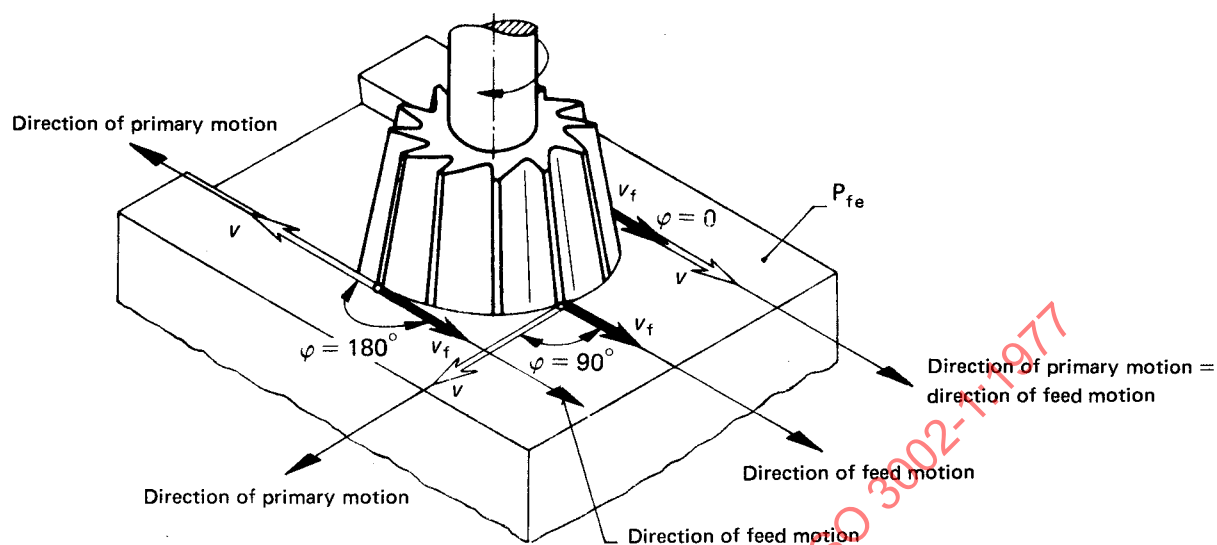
Tool and workpiece motions considered at three selected points on the cutting edge —
